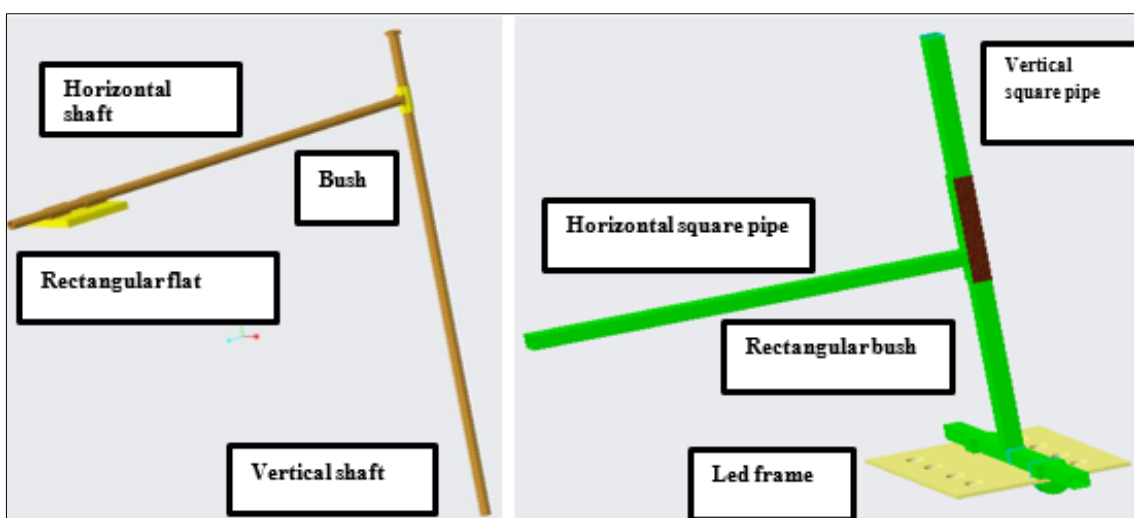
Camera assembly (left) and led assembly (right) for laboratory setup
